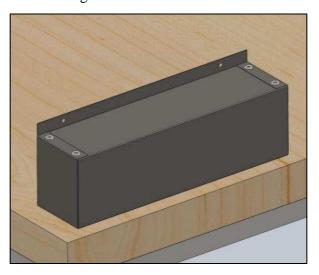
Installing Rivets- Place rivets in all four holes drilled in <u>Step 8D</u>.
